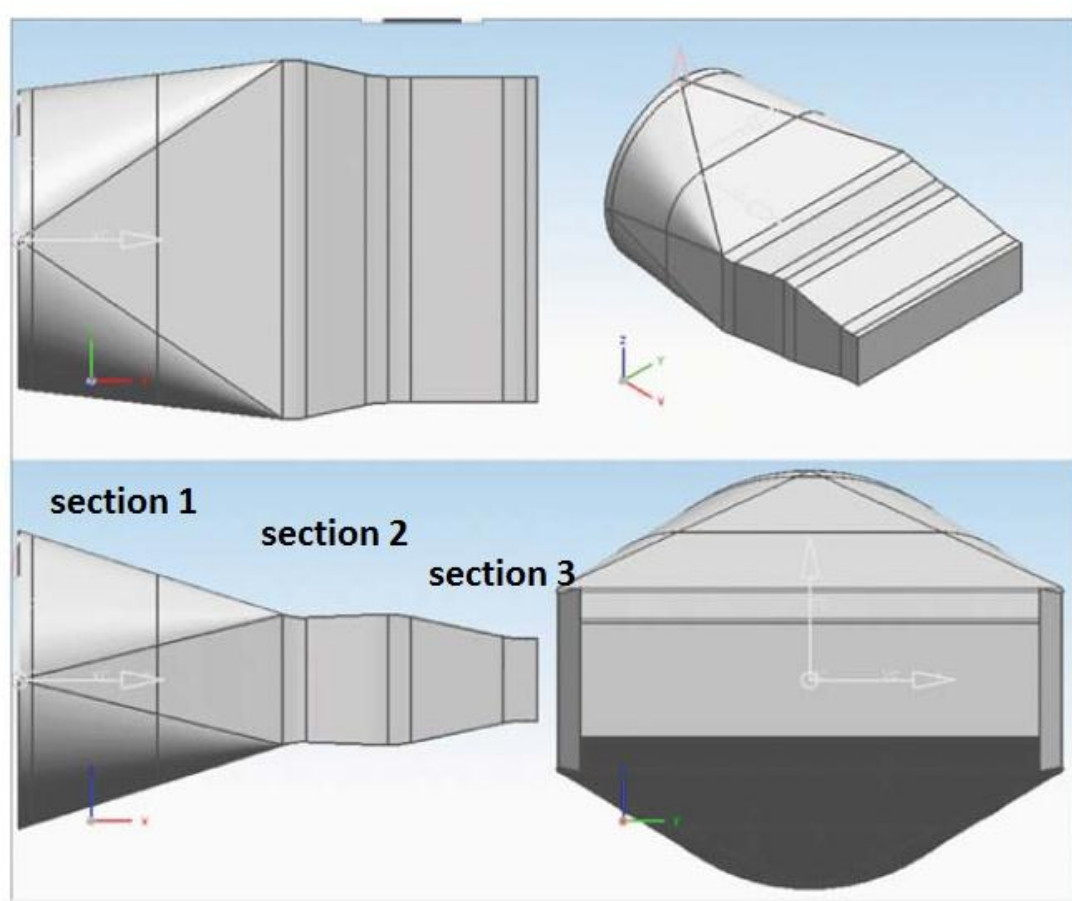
Sectional view of rectangular nozzle geometry with $AR = 4$
